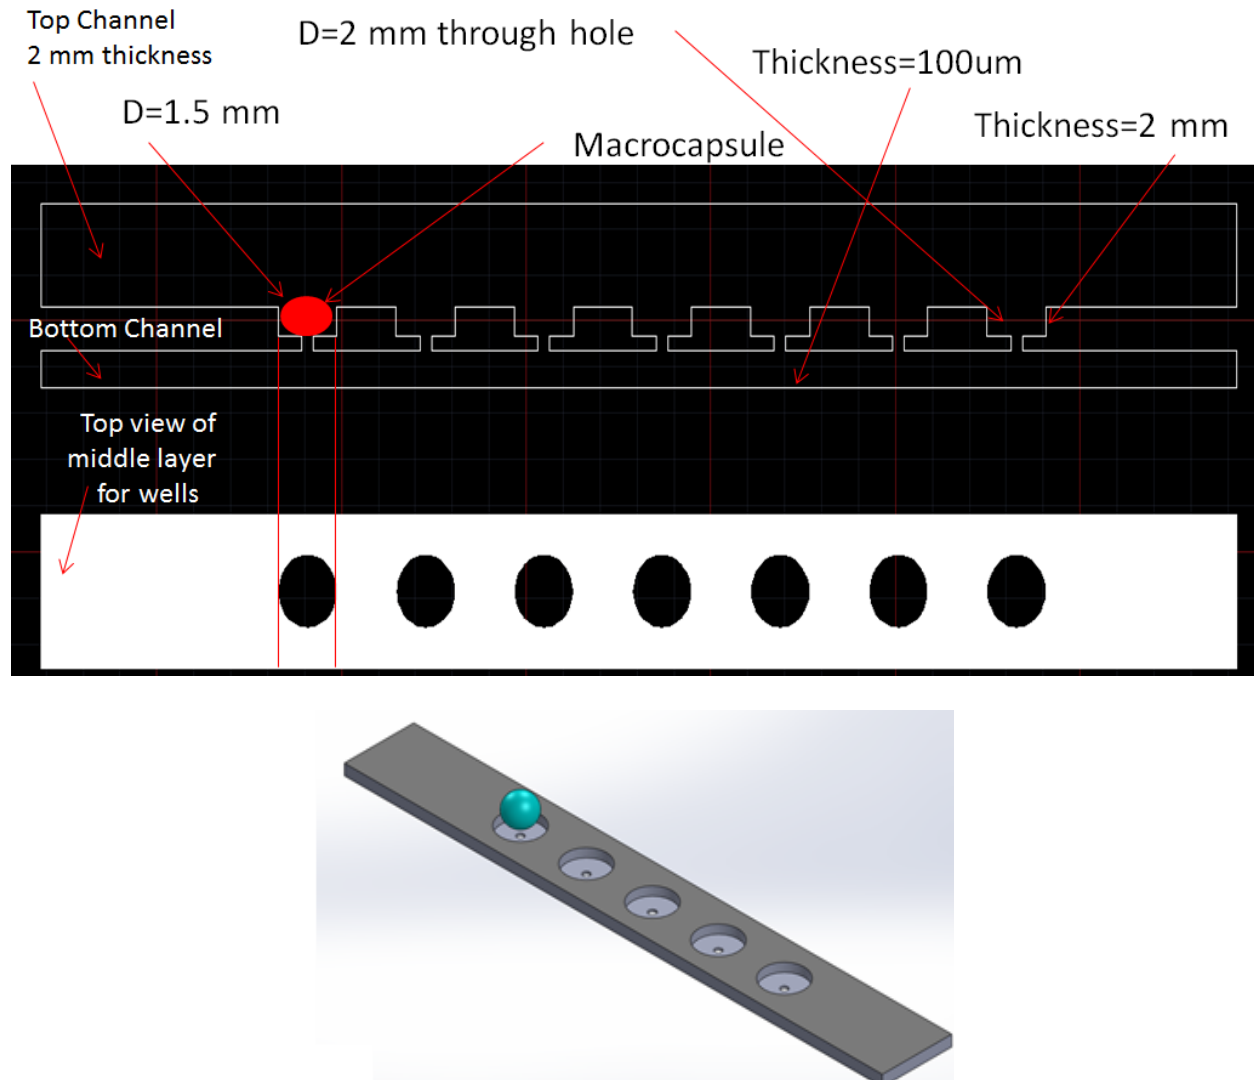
Schematic of macrocapsule array. Top: side view of three layers and dimension of the wells and channels. Bottom: Structure of wells in middle layer.
